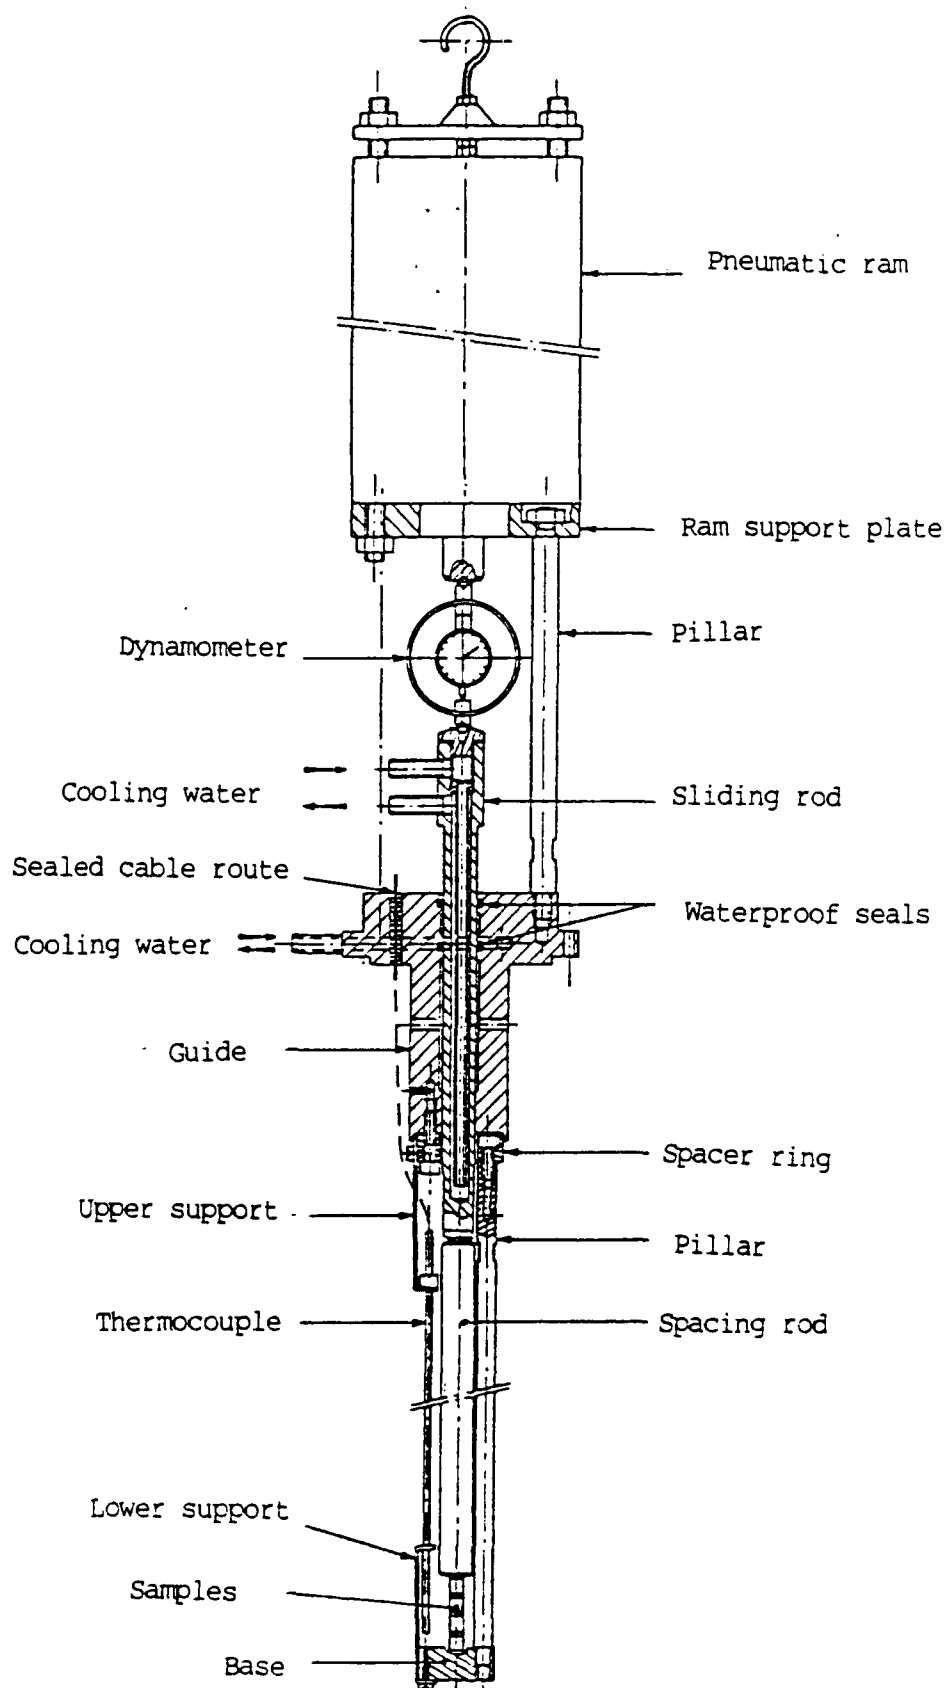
Demountable assembly allowing samples for bonding to be held under pressure
